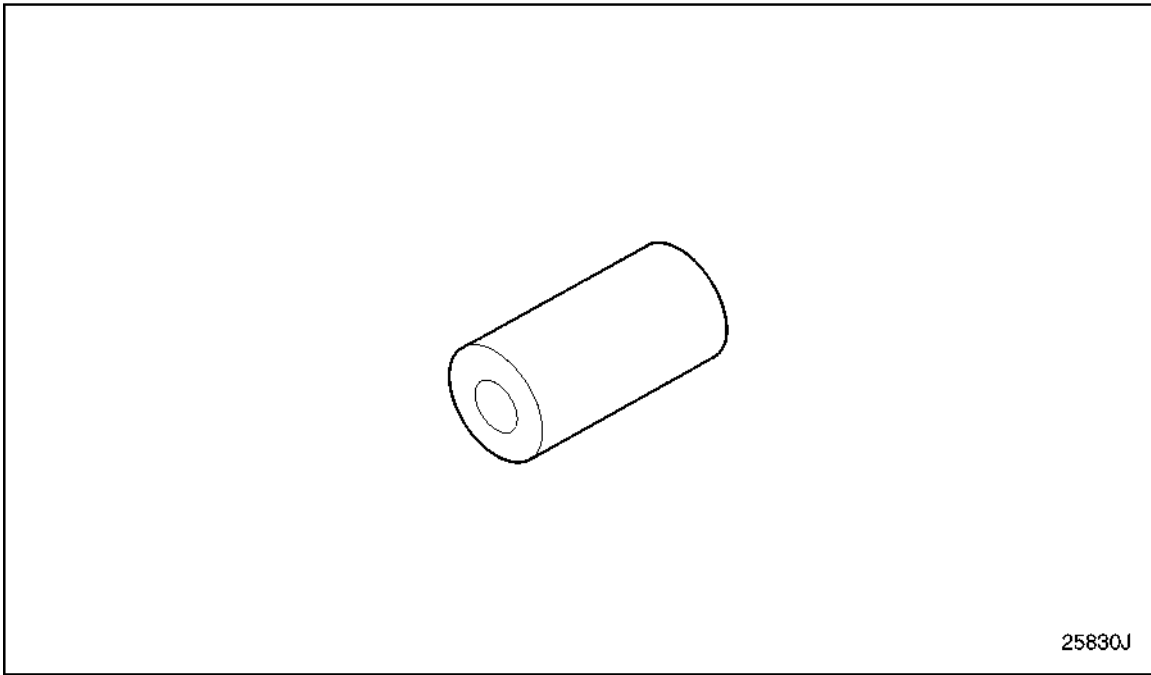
Fuel Pump Drive Bearing Inst/Remv,J 41795
